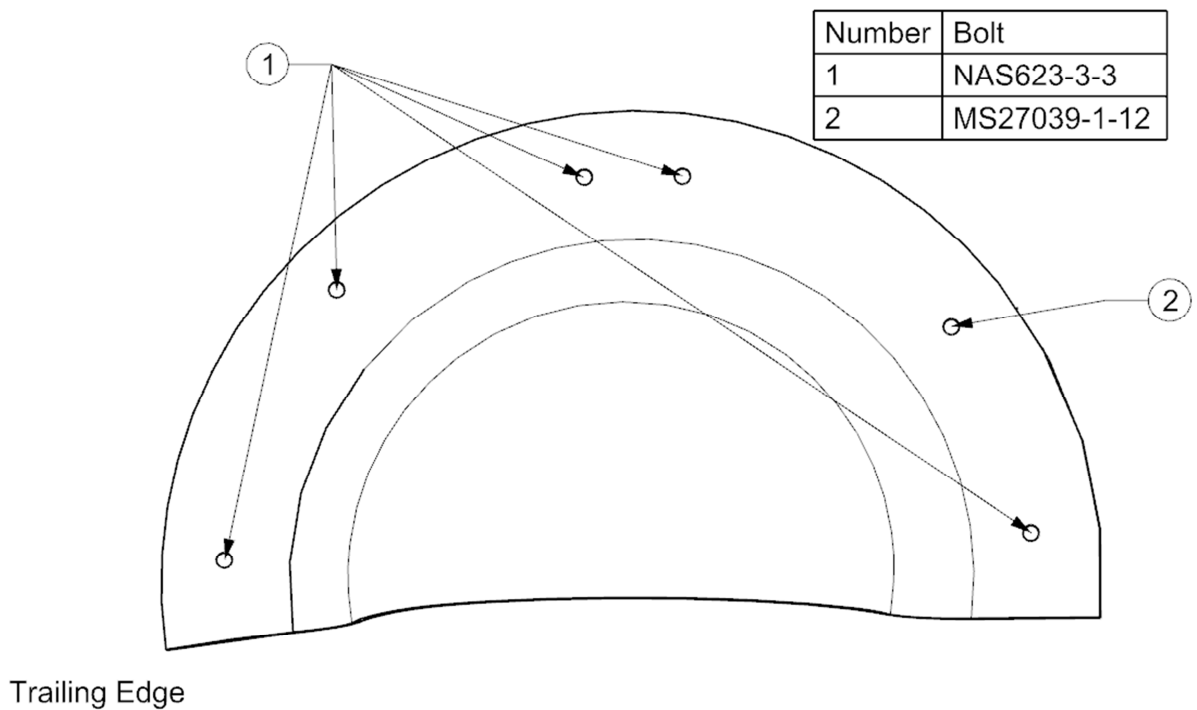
Center Wing Pylon Aft Lug Cover Fastener Placement
